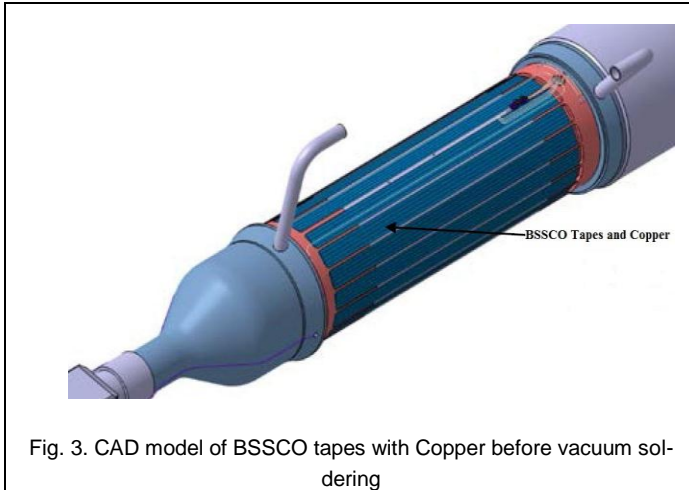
CAD model of BSSCO tapes with Copper before vacuum soldering
